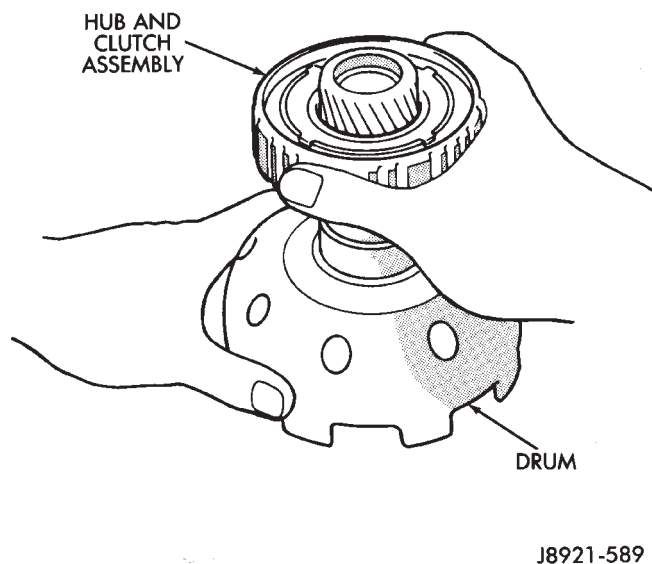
Removing/Installing Brake Hub And Clutch Assembly
